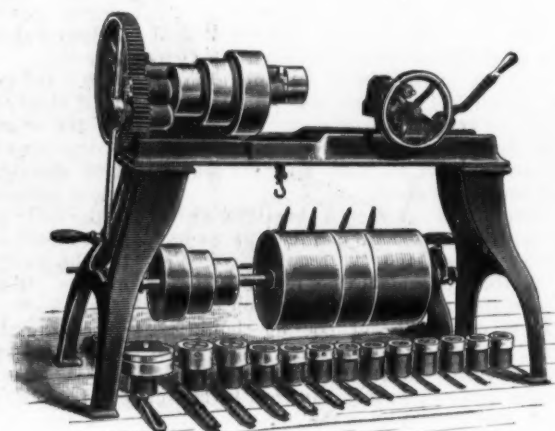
Bolt Cutter, Nut Tapper and Pipe Threader.
